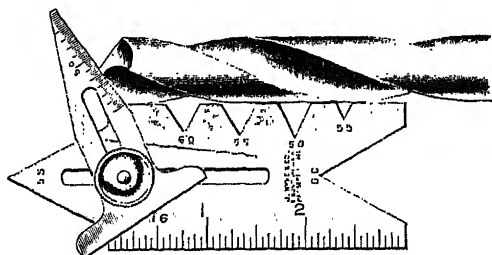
A.—Screw-cutting gauge testing drill (Wyke's patent).
